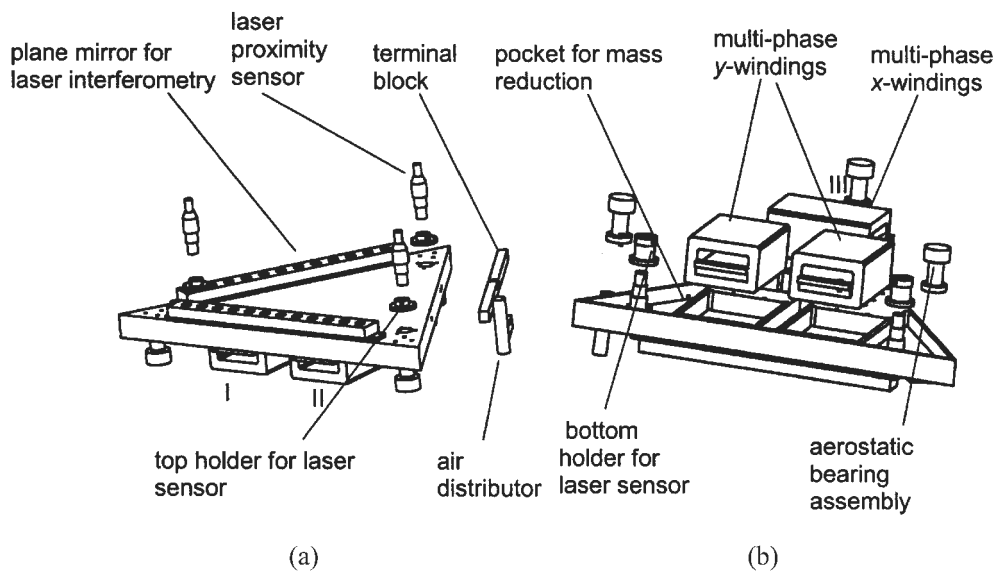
Exploded view of the platen assembly from (a) the top and (b) the bottom
